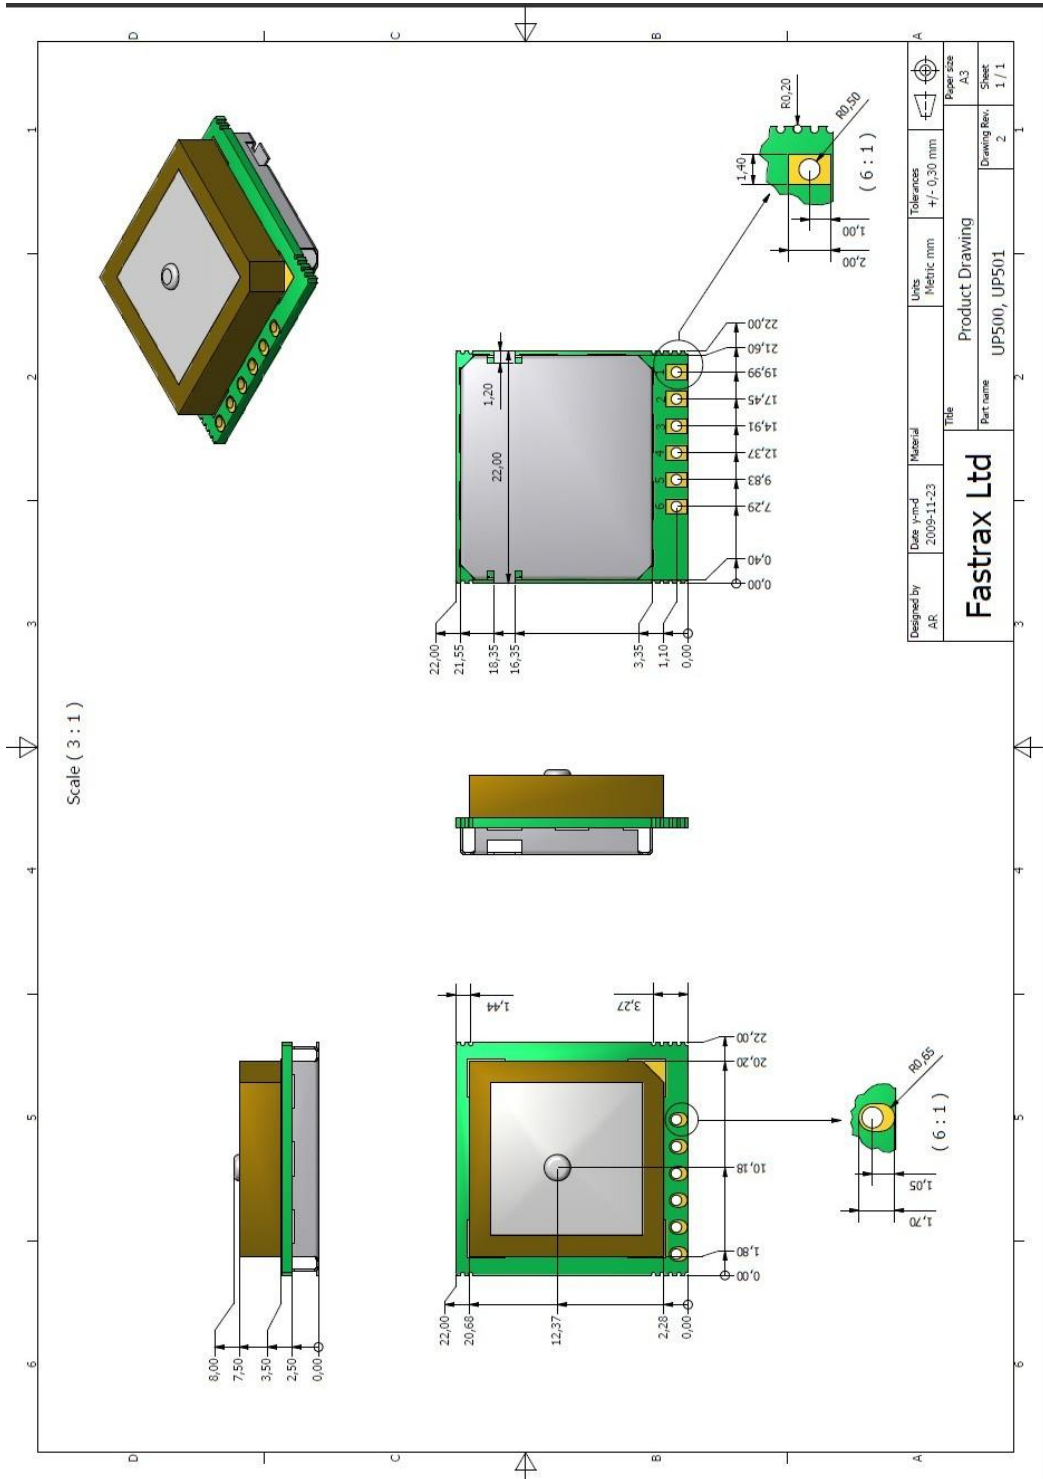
Mechanics drawing of the Fastrax UP501 module.
